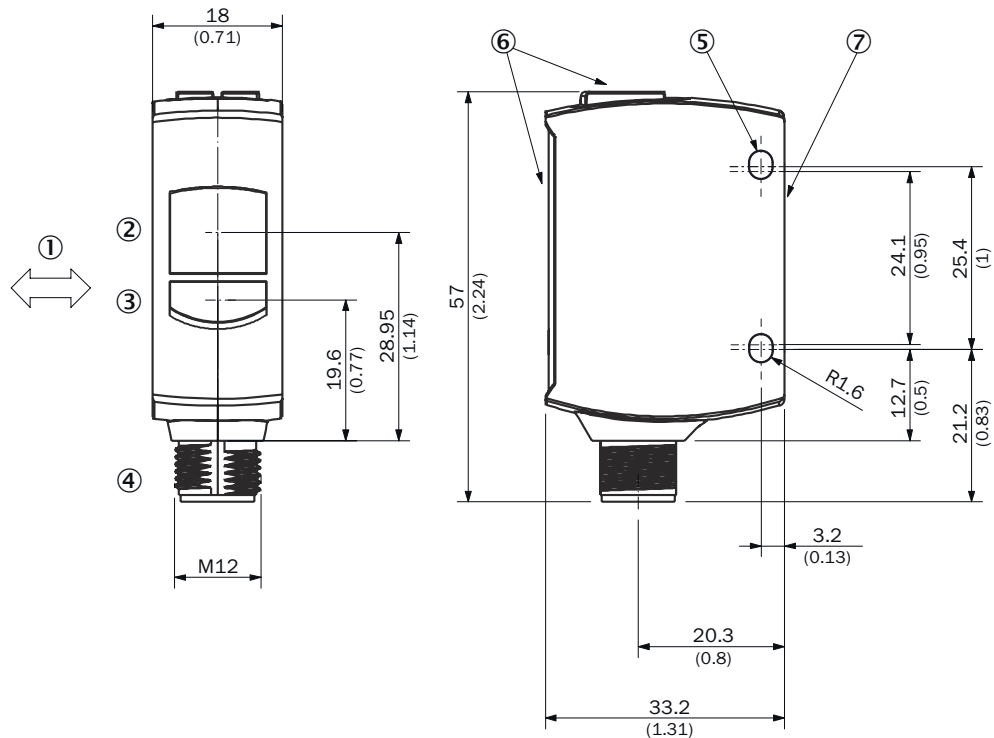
WTM10L-xxxxx1 and WTM10L-xxxxx2
